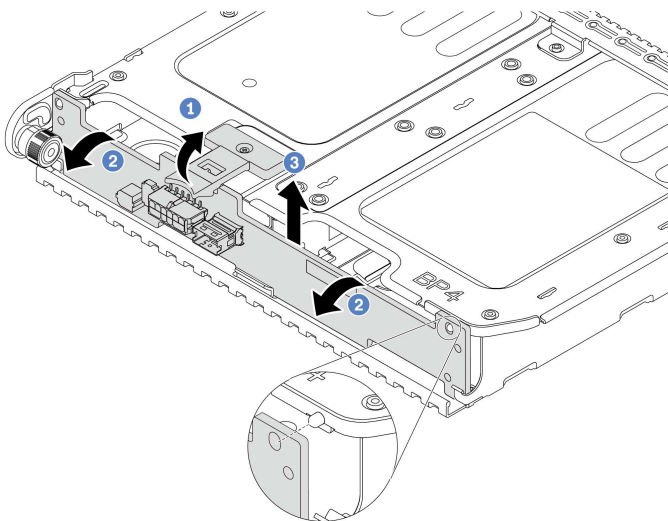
Removing the 2 x 3.5-inch rear drive backplane
